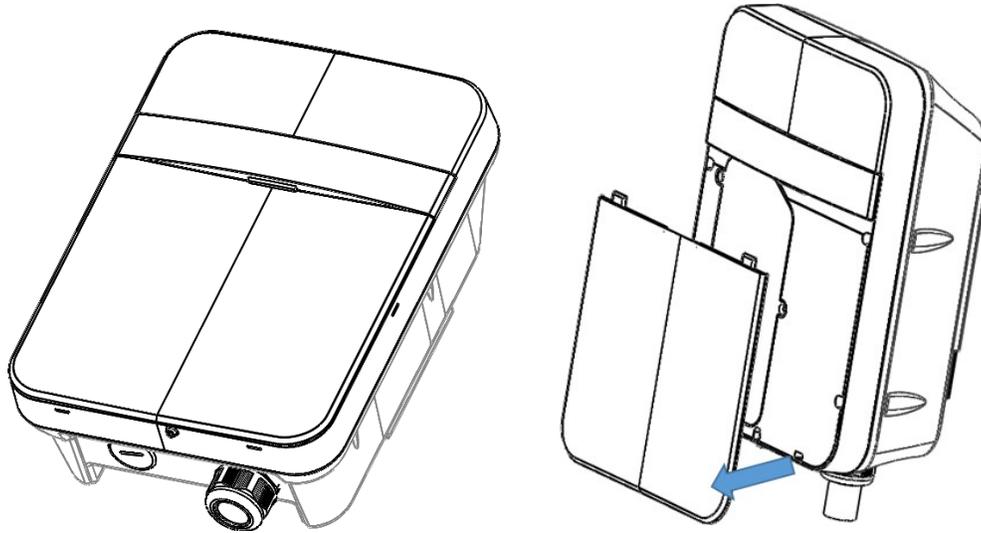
Use Flat Tip Screw Driver To Push Snap Then Open Front Cover
